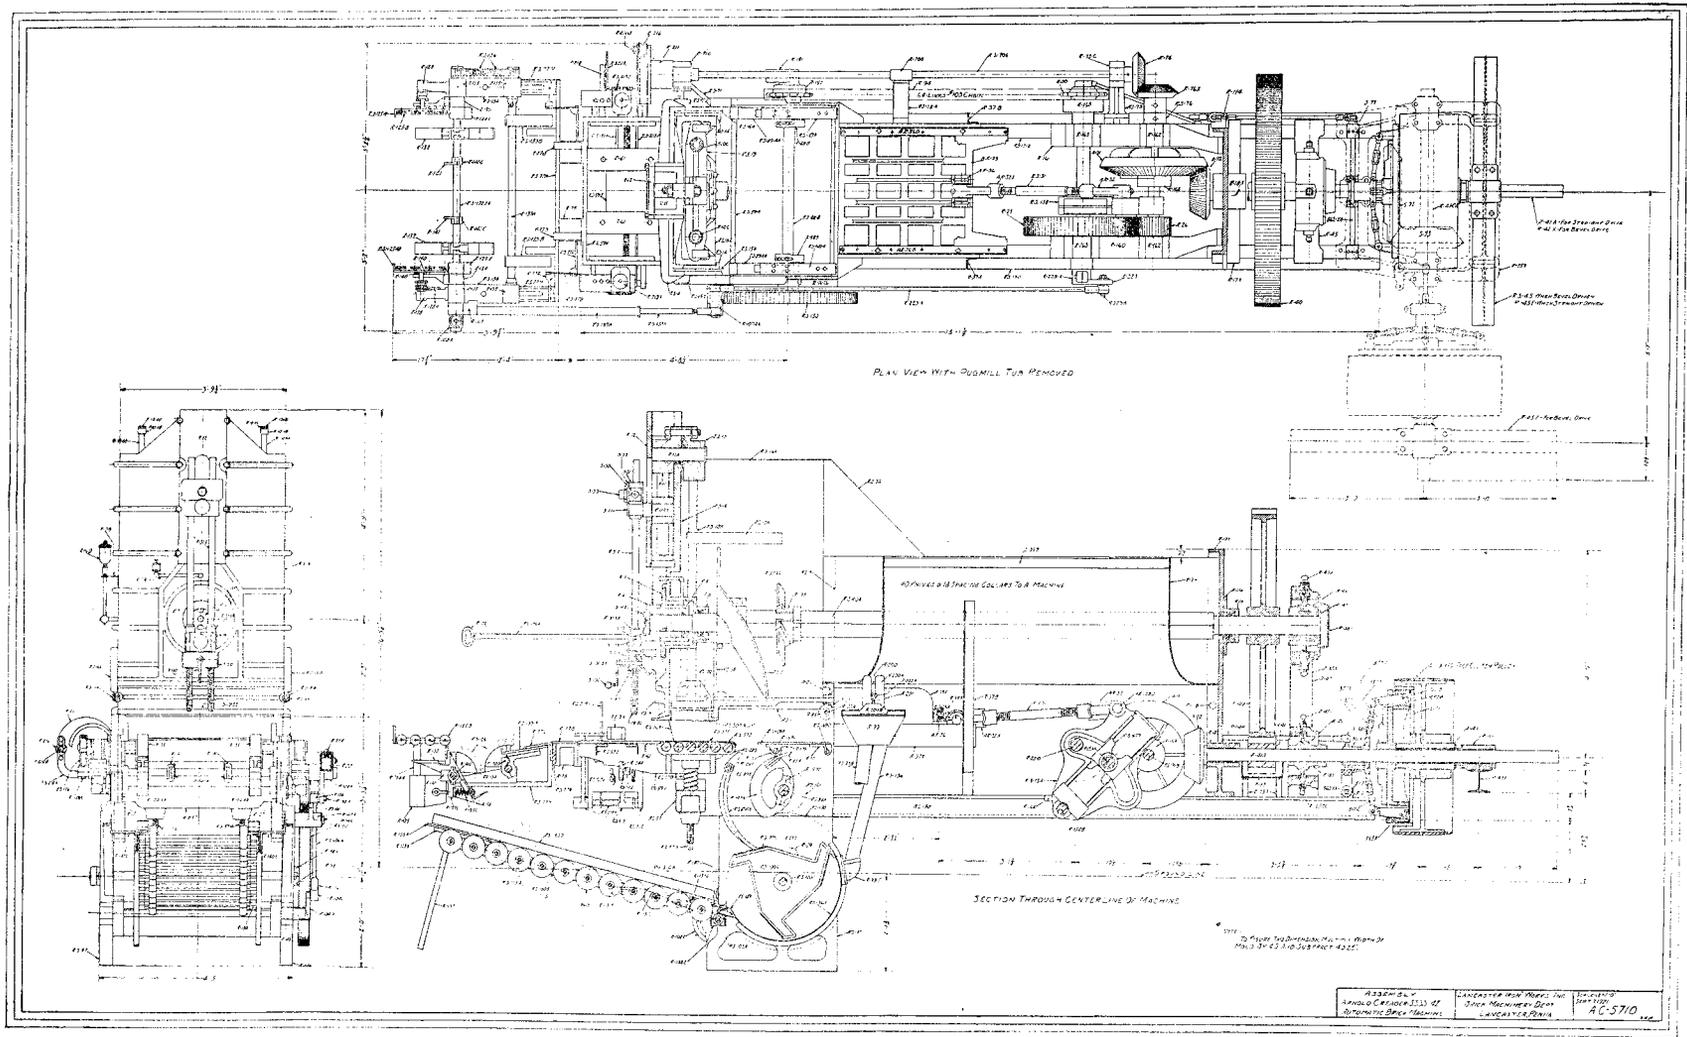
Automatic soft mud brick molding machine. (Cut by Lancaster Iron Works.)
